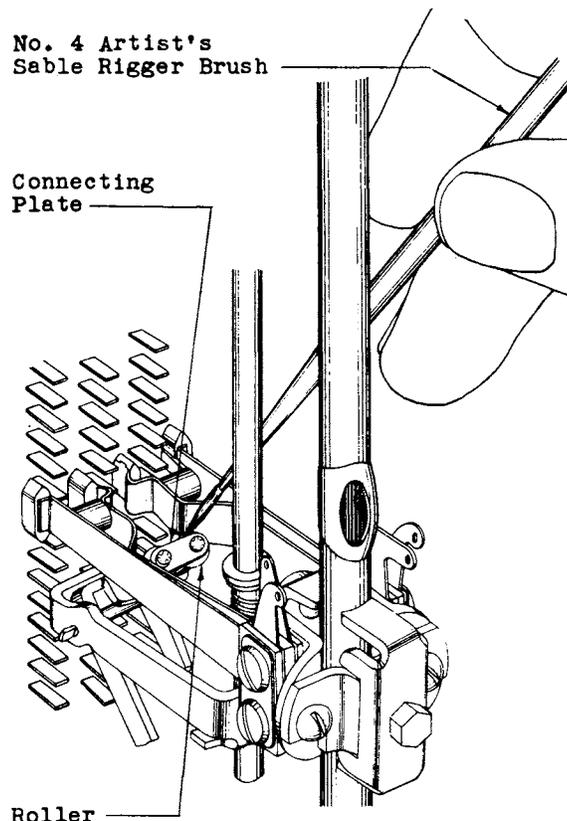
Method of Lubricating the Connecting Plate and Rollers on the Trip Lever Assembly
